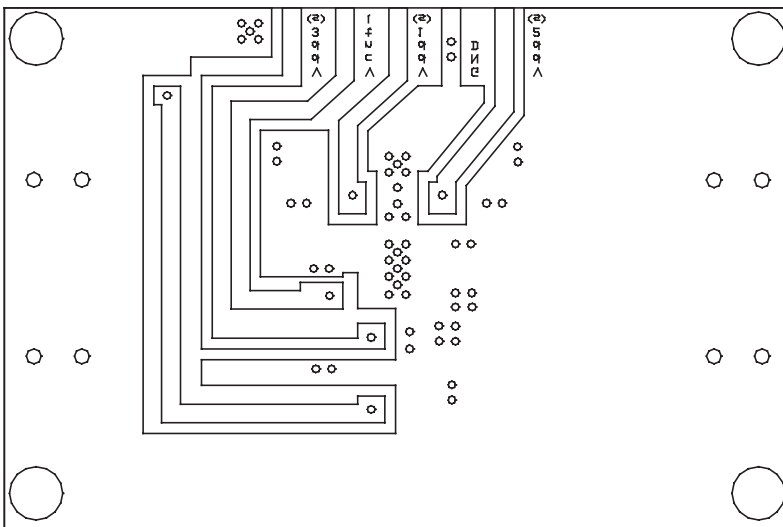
Layer 3 – Bottom Metal & Solder Mask.
